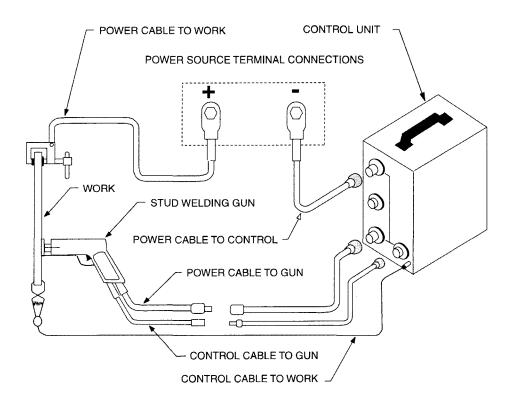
Basic Equipment Setup for Arc Stud Welding
